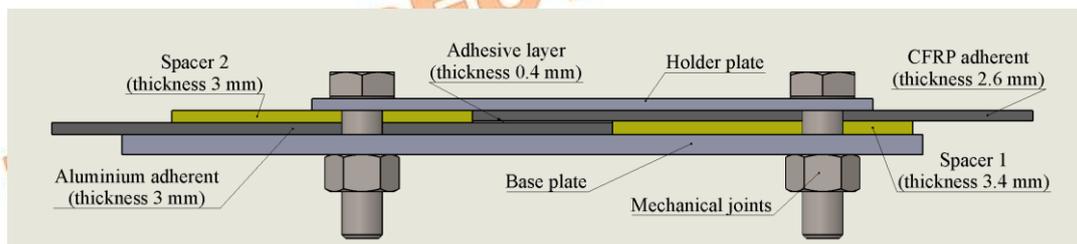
(a) Schematic of Adhesive bonding joint fixture.
